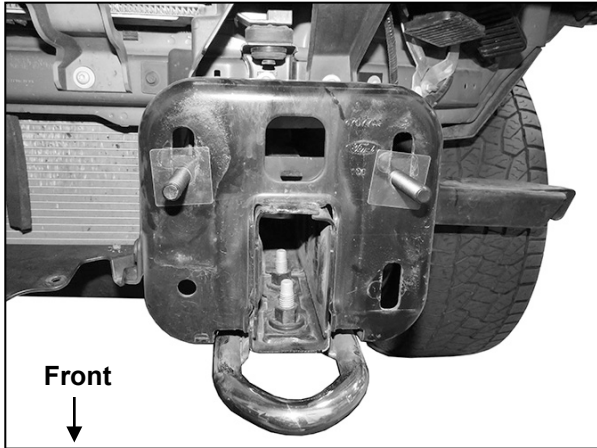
Use a flat blade screwdriver to pry off the clips attaching the factory bolt plate
